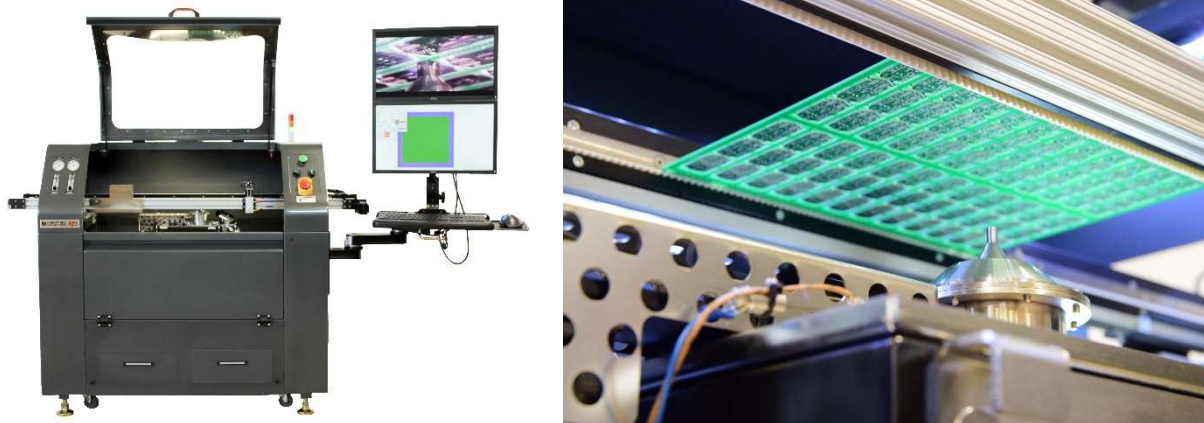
Vector 300 compact selective soldering system (left), and soldering of 72-up PCB panel (right)
